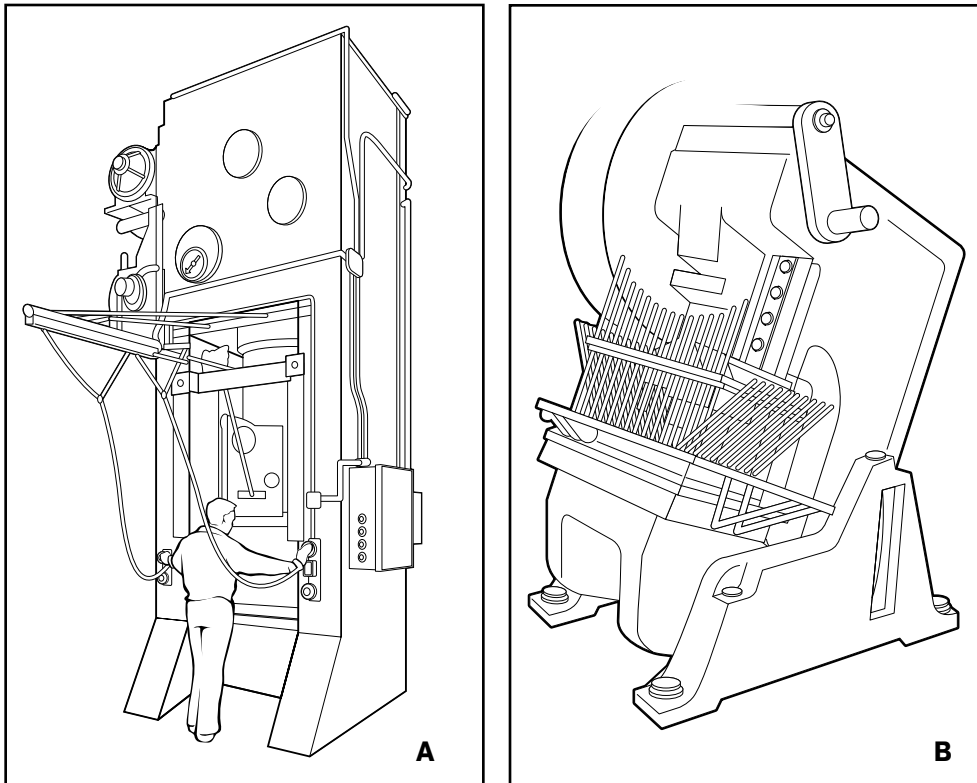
Most common punch presses in general use. (A) Straight side hydraulic power press (no flywheel) – press remains in vertical position. (B) OBI (open back inclinable) mechanical punch press – press can be tilted back to allow formed parts to drop out of the back.
